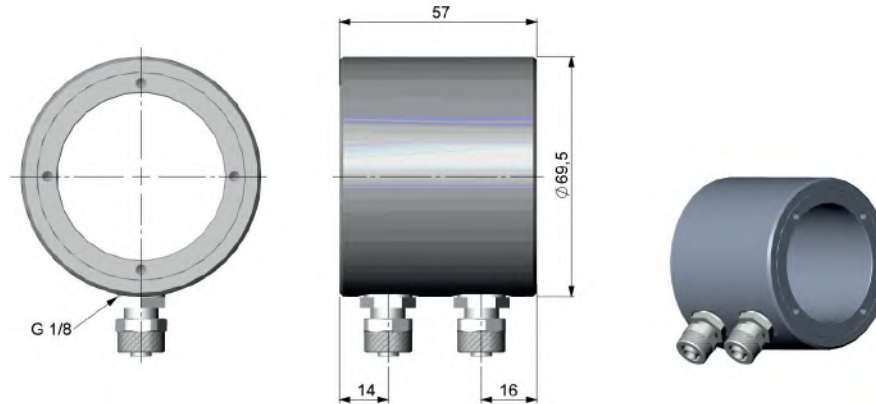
Dimensions water cooled housing [TM-W-CTL], hose connection: 6x8 mm, thread (fitting): G 1/8 inch
